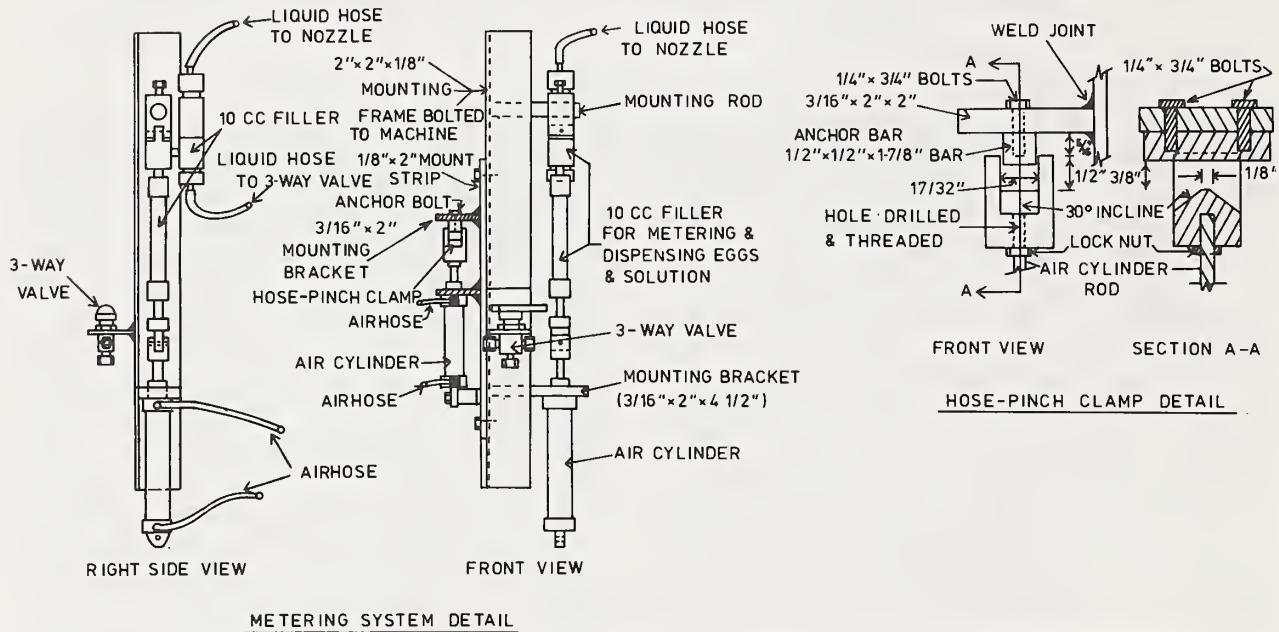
Details of the metering system and hose-pinch clamp.
